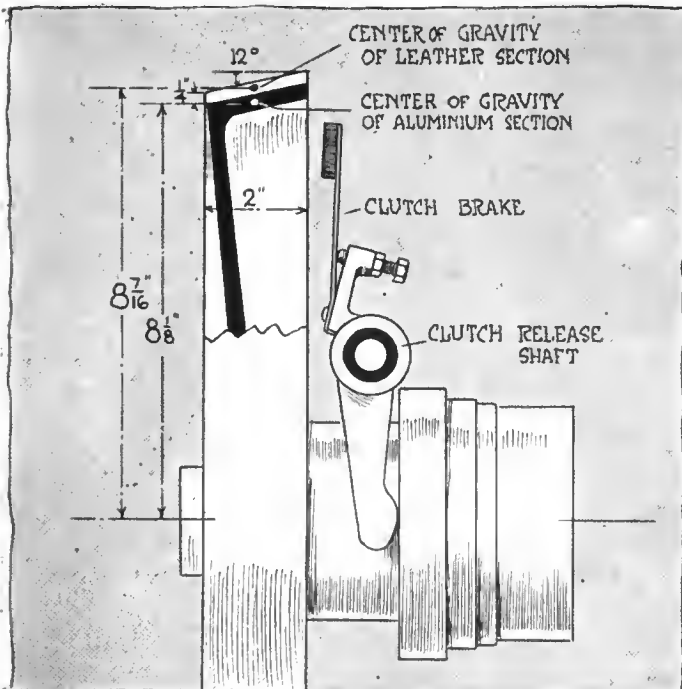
Dimensions of clutch showing also adjustable clutch brake fitted to release shaft
